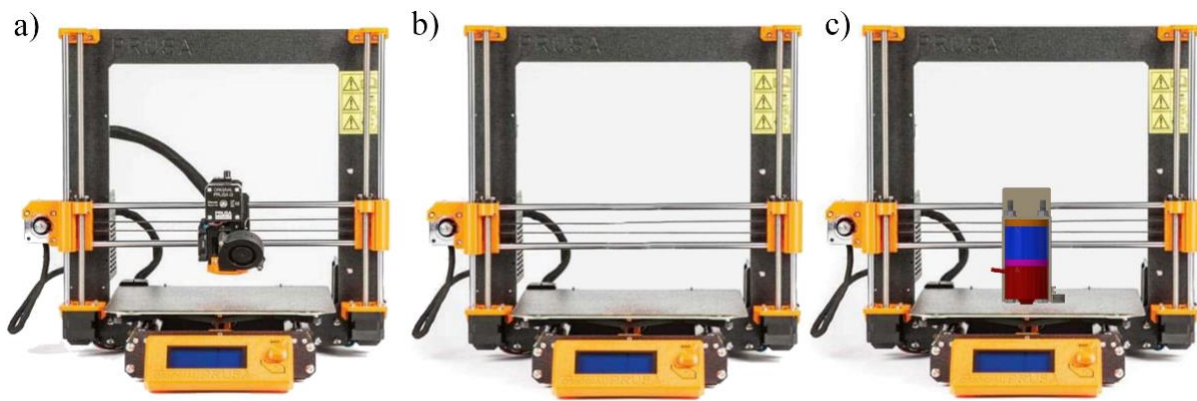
Prusa i3 MK3S 3D Printer for x-y-z Controller a) Stock Printer b) FDM Printhead Assembly Removed c) Modular Bioprinting Assembly Attached (Prusa Research a.s. 2021a)
